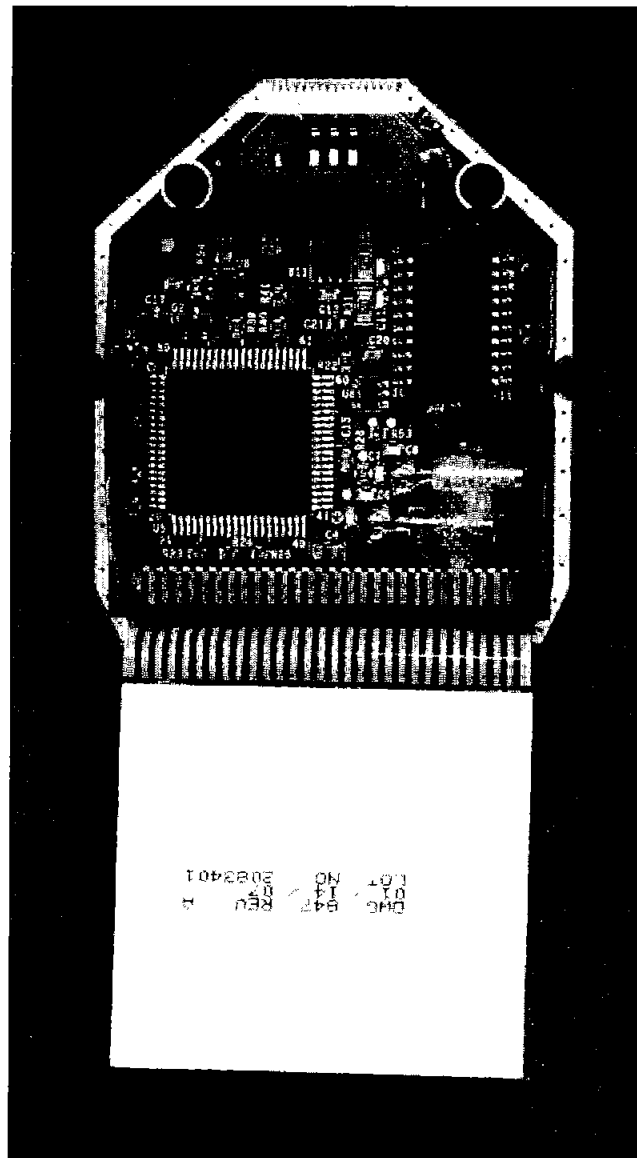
LifeScan OneTouch Ultra – Front of PC Board with LCD Panel Removed
